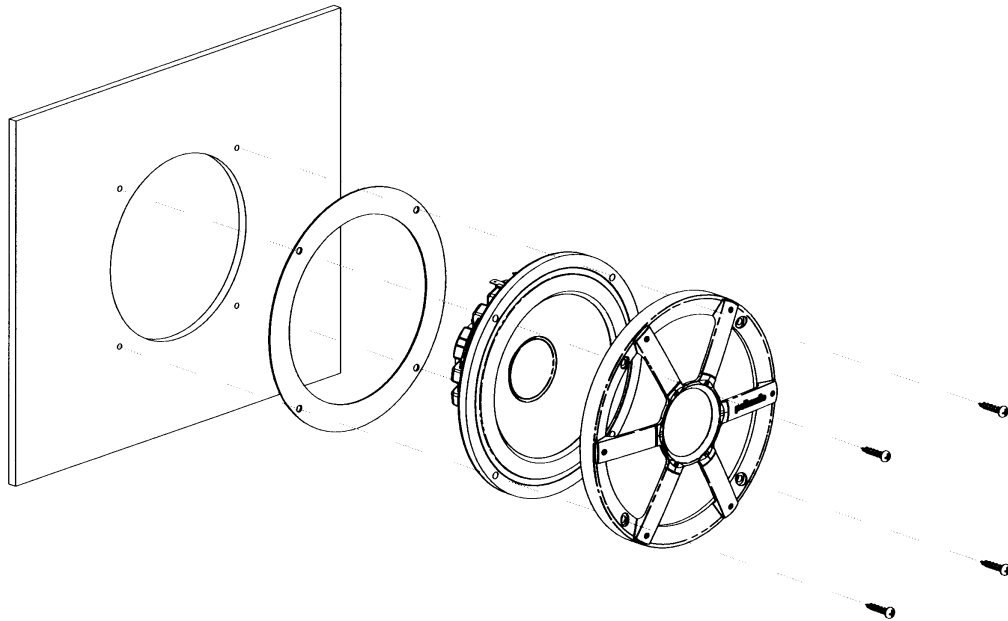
INSTALLING MM651/MM6501 WITH GRILLE
